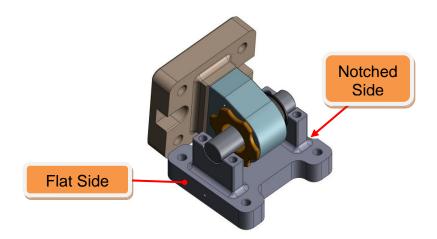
Engage two sides of the Locker Assembly by laying the Locker Spherical Pin in the Locker Pin Base. Note the orientation of the Locker Sleeve with respect to the Base.
